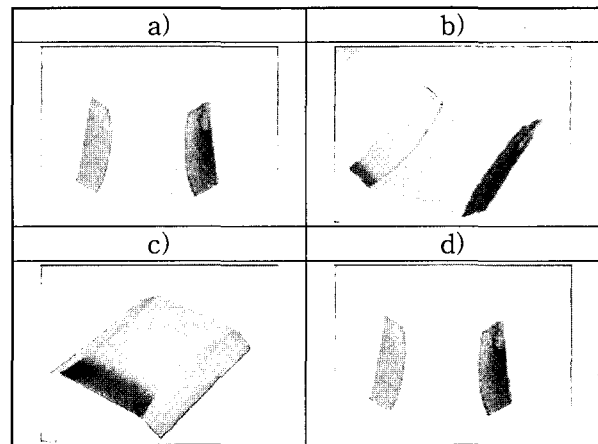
3D forming of thin metal sheet by laser<sup>18)</sup>
